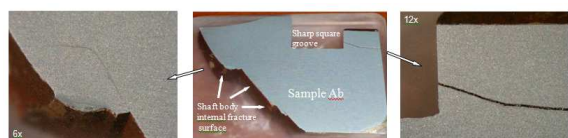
Polished and etched specimen Ab, showing some cracks formed on a spline tooth and on the shaft body internal fracture surface. It is also seen that the groove of this broken quill shaft A is a sharp square, without any radius applied. Beside that the splines pitch diameter is made less than the body shaft diameter
